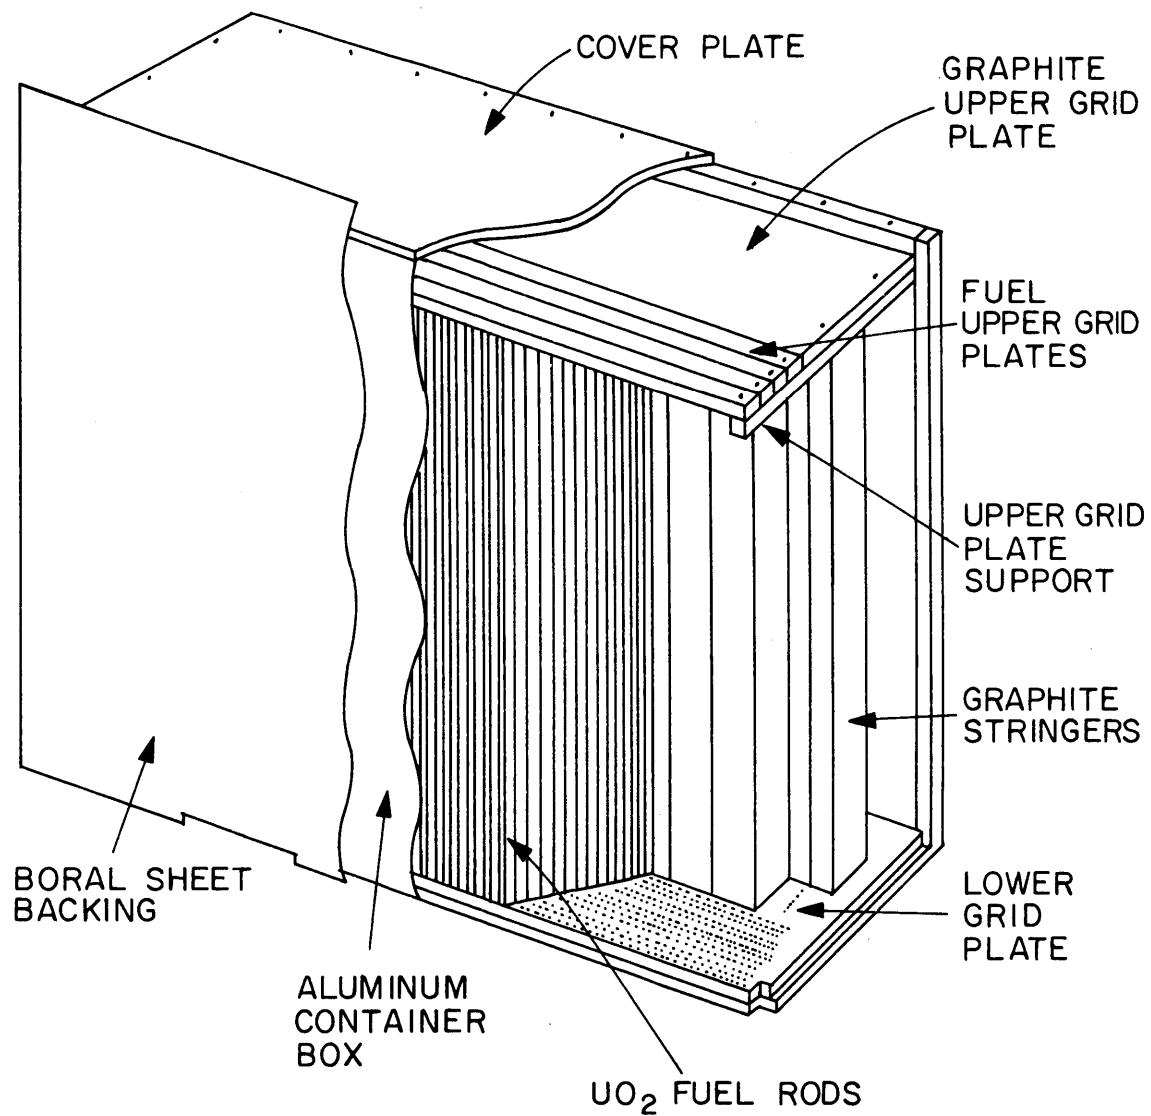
CUTAWAY VIEW OF THE CONVERTER ASSEMBLY
